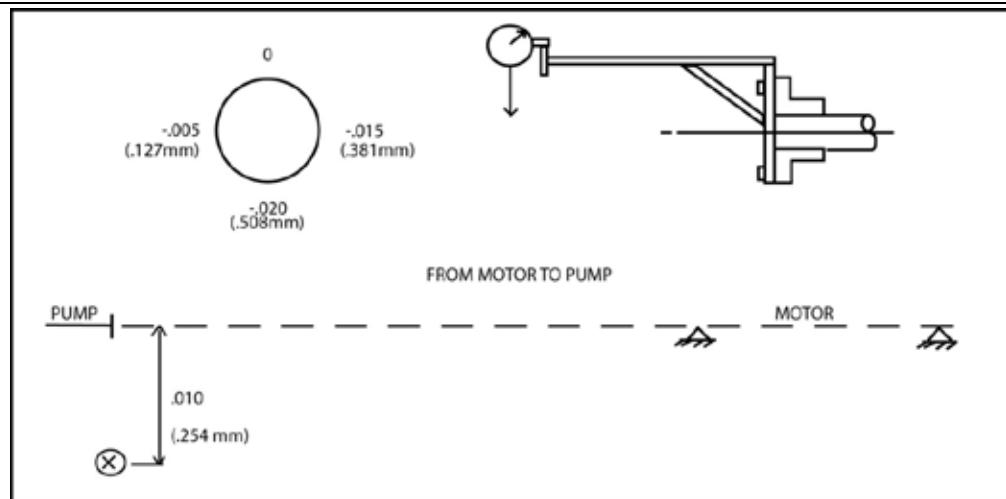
Motor shaft extension relative to the pump shaft center line.
